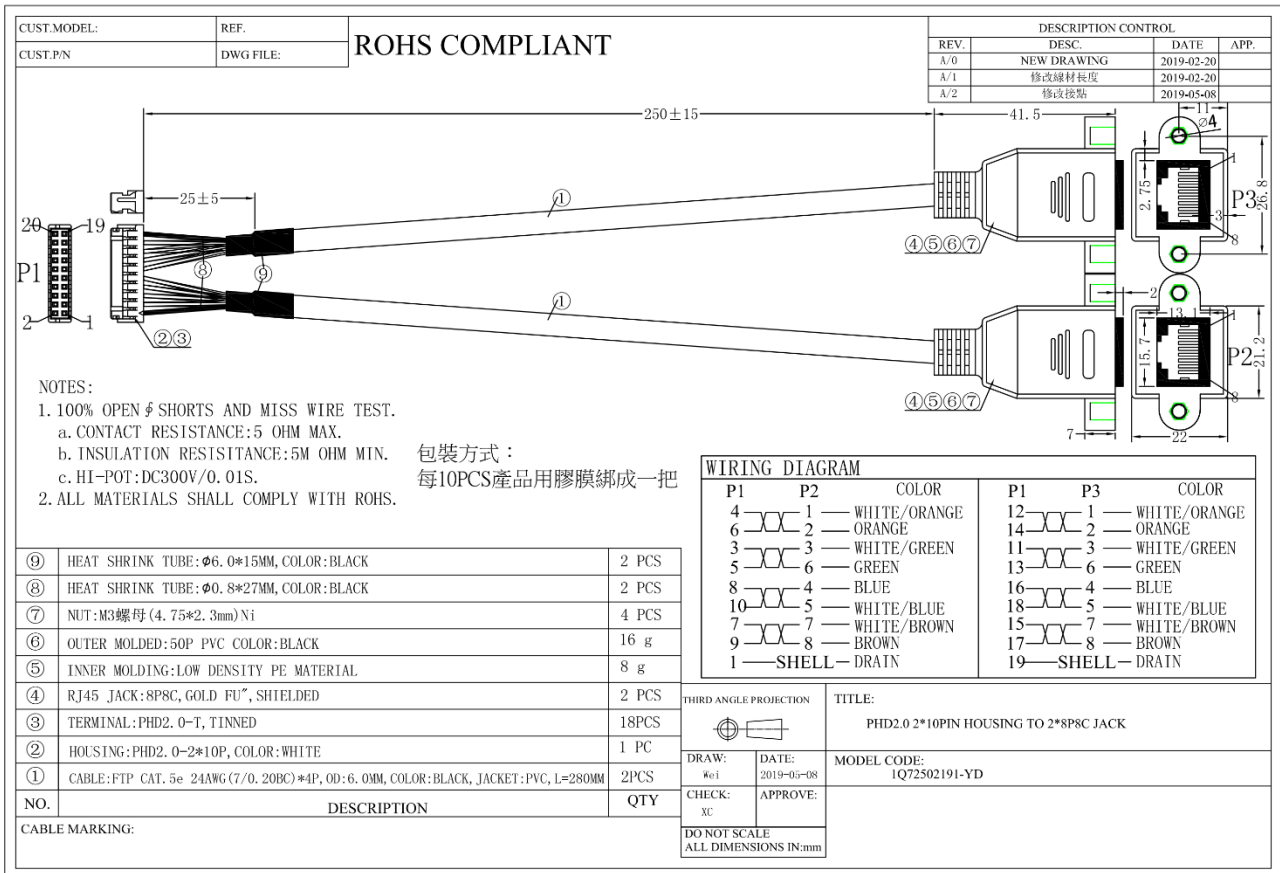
20pin Pitch 2.0 Connector to 2 RJ45 Cable Drawing
